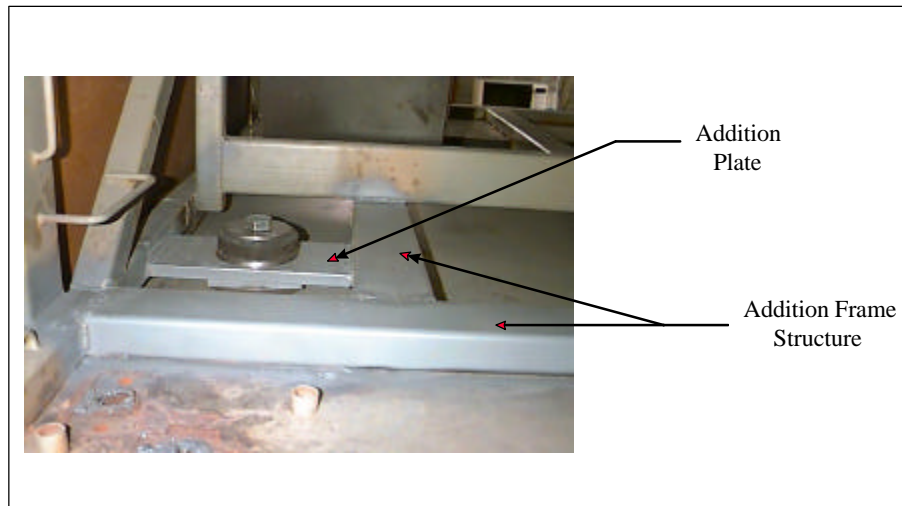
Modifications to the Cab for Installing Aft Base Mounts
